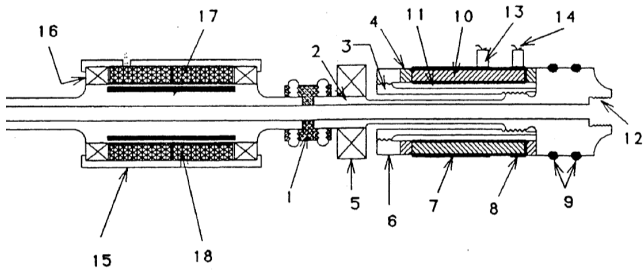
A schematic drawing of the mechanism using a rotating engine and piezoelectric crystal to simultaneously translate and rotate the cutter. Relevant components: 1 = motor coupling, 2 = stem extending from piezoelectric crystal, 5 = bearing, 7 & 8 = electrodes on surface of piezoelectric crystal, 9 = o-ring seal, 10 = piezoelectric crystal, 12 = connection for cutter, 13 = brush, 14 = spring, 15 = housing, 17 = rotating armature of motor, 18 = windings of electrical motor, Adapted from: [92].
